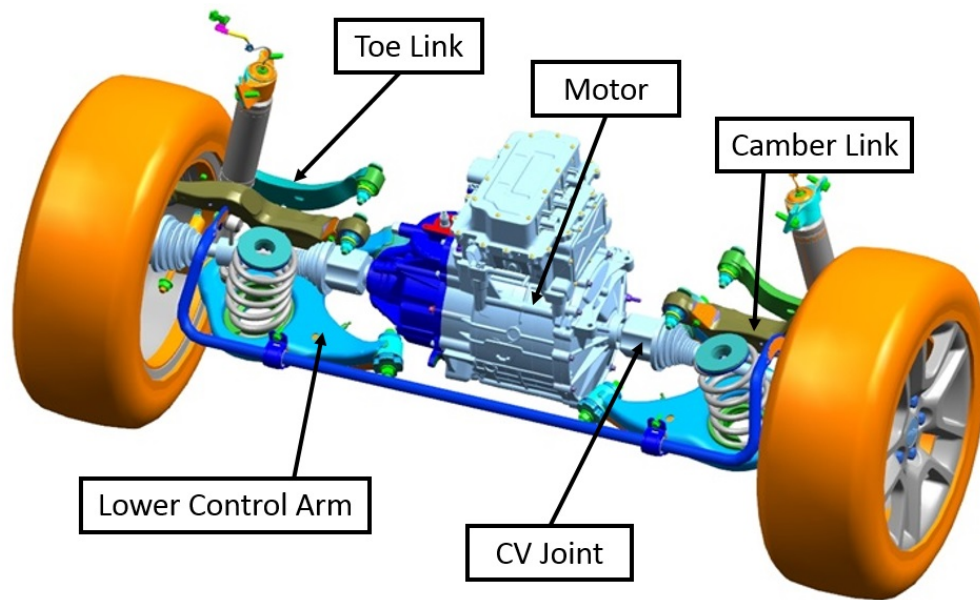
Buick LaCrosse AWD rear suspension with motor in place - rear view.
